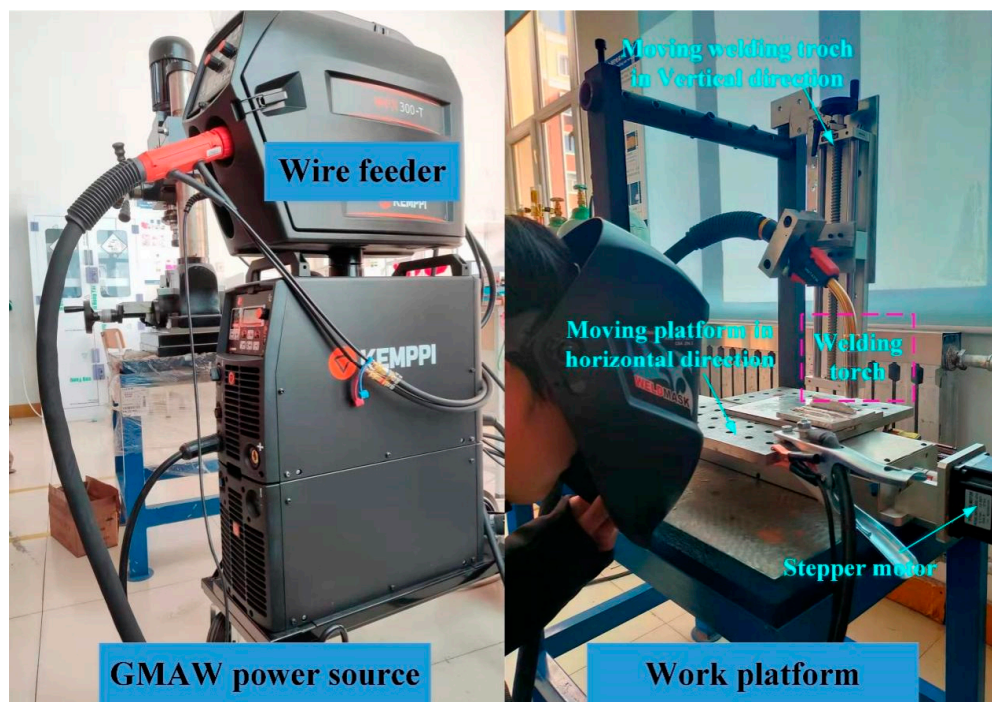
The external longitudinal magnetic field hybrid gas metal welding additive manufacturing (M-GMAW-AM) system.
